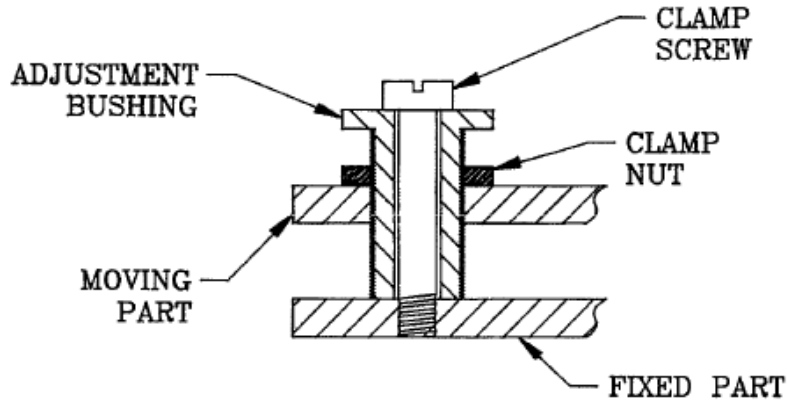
A linear mechanism with a threaded bushing and clamp screw suitable for applications requiring disassembly.
